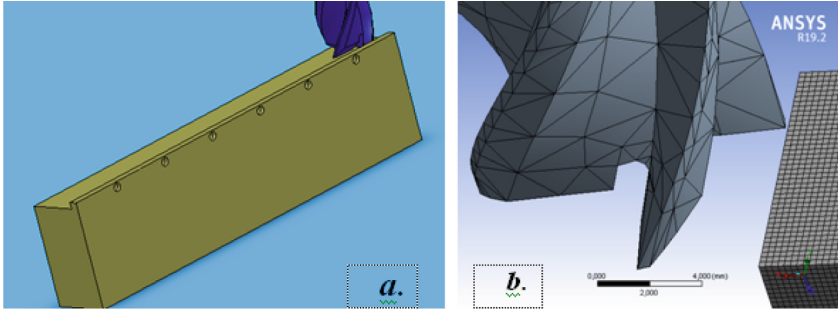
3D model for assembly workpiece-end mill; *a.* 3D model in SolidWorks; *b.* Assembly in Ansys Workbench, with the Mesh applied
